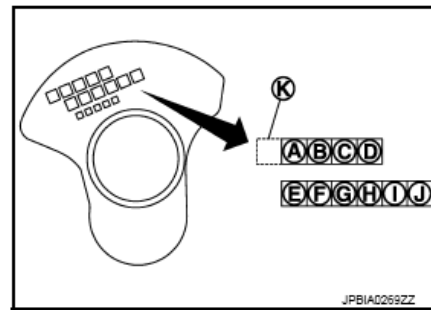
Identifying Bearing Housing Grade And Cylinder Bore Grade Numbers On Crankshaft
